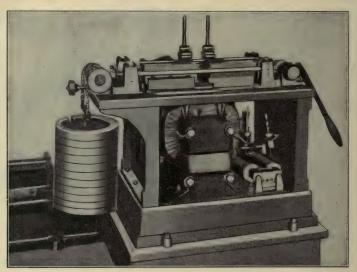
Thomson Automatic Electric Welder.
